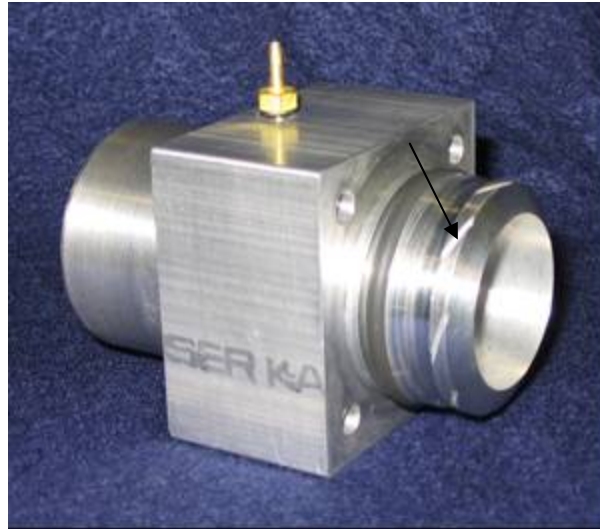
Outlet skimmer tested with shortened acrylic AAC. The arrow indicates one of eight grooves around the leading edge.
